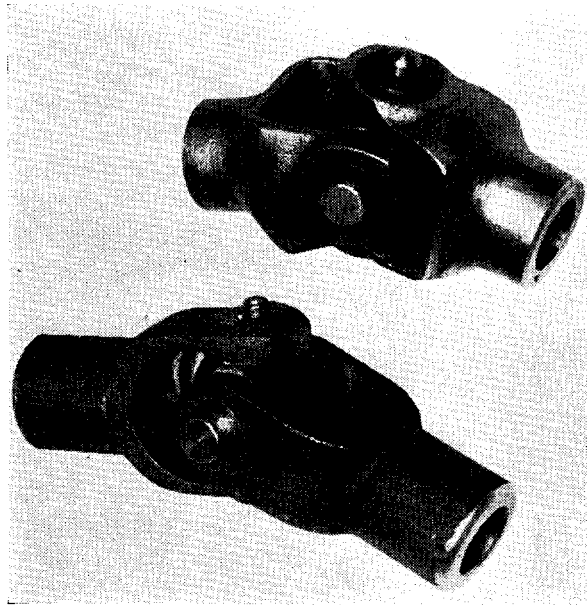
COMPARISON BETWEEN OLD AND NEW ADMIRALTY ROD-GEARING JOINTS
